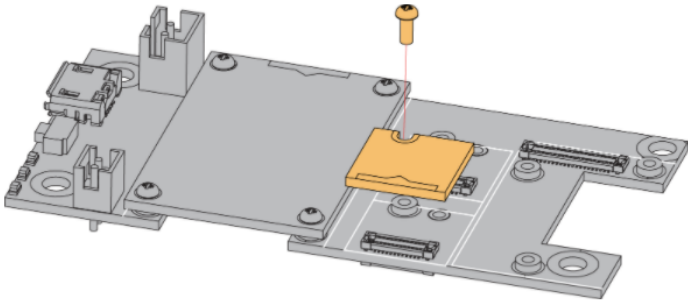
RAK12034 WisBlock 9-Axis Accelerometer Module mounting
